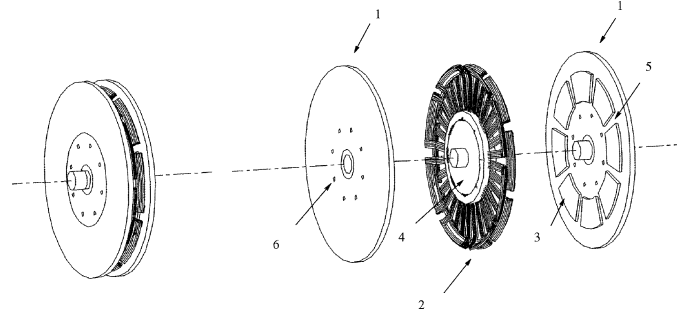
Exploded view of an AFPM machine, 1: rotor discs, 2: stator winding, 3: permanent magnets, 4: epoxy core, 5: radial channels, and 6: air-inlet holes.
